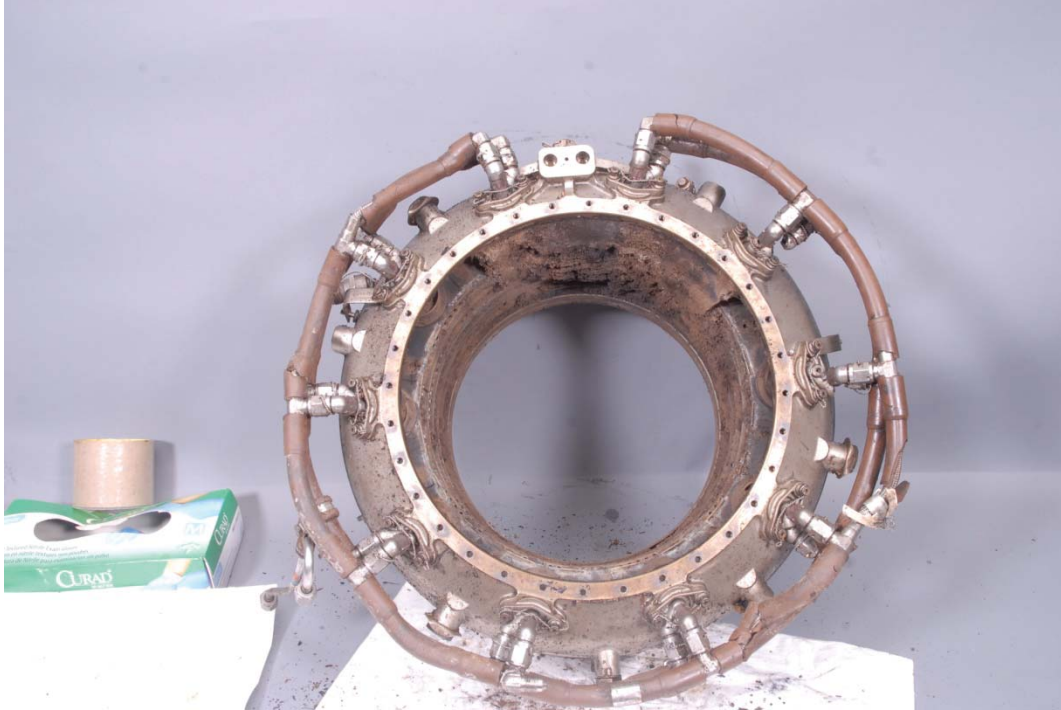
P-79297C, Second-Stage Compressor Diffuser Vane Assembly, FLA
